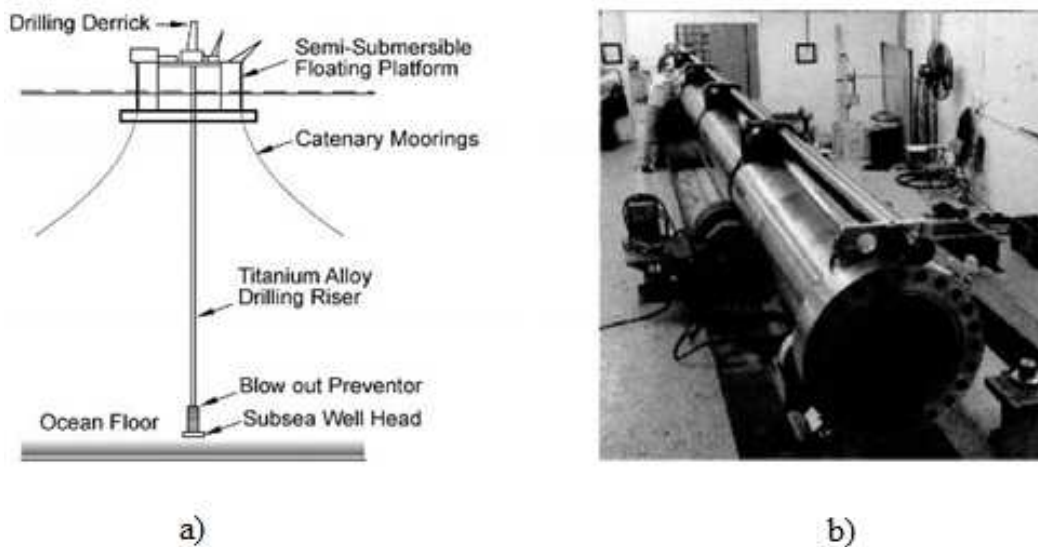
Titanium alloy drilling riser a) schematically b) riser string joint [9]
